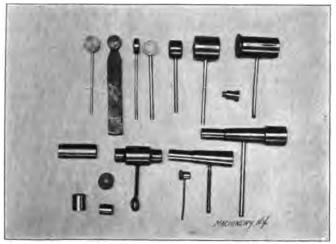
"Typing Tools" Used by Die-sinkers to Form Circular Cavities
